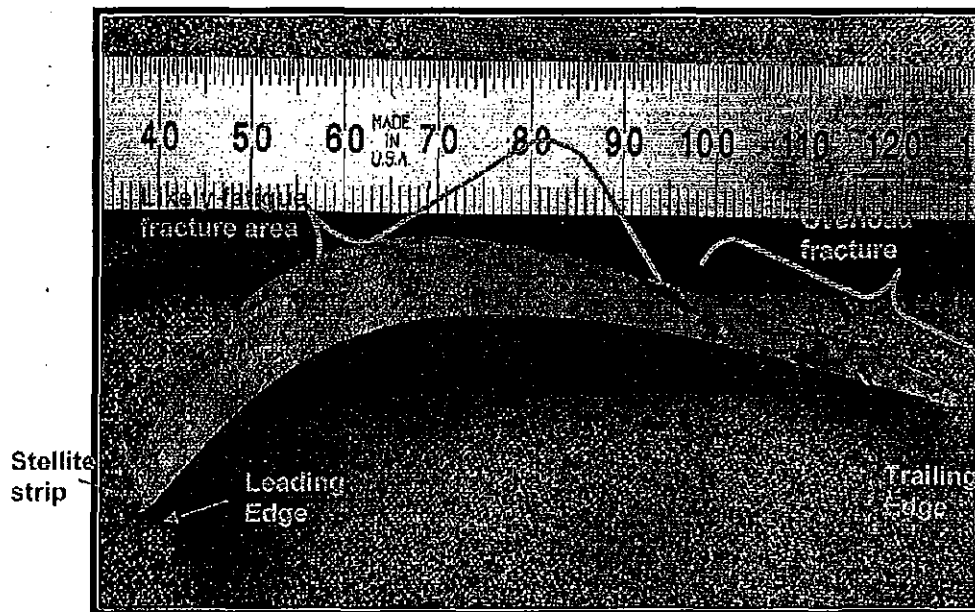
Macro photograph of fracture surface of LP-A L-2 #49 blade. Fracture surface was cleaned to remove thick oxide deposit. Flat fracture surface can be seen from the leading edge continuing into a fracture surface due to overload towards the trailing edge.
